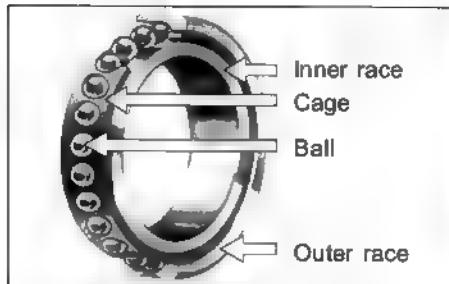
A sectioned single-row ball bearing, showing the component parts. Photo courtesy the Timken Company.
